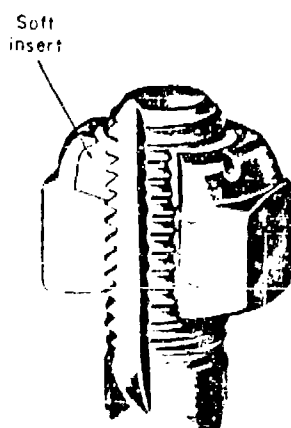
Self-locking nut with relatively soft insert that grips threads to prevent loosening. (Courtesy of Elastic Stop Nut Corp.)
